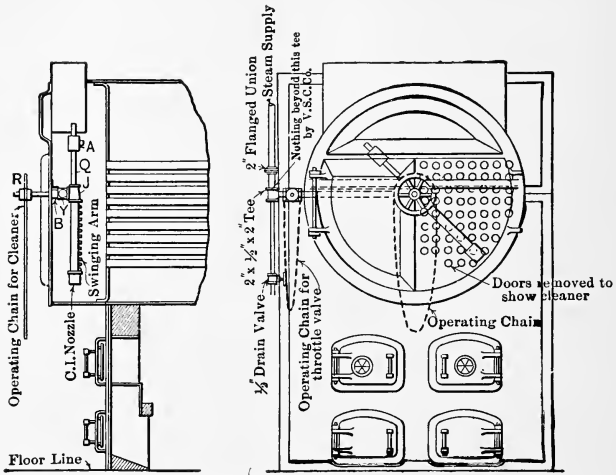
Vulcan Soot Blower Installed in Front End of a Return Tubular Boiler.
